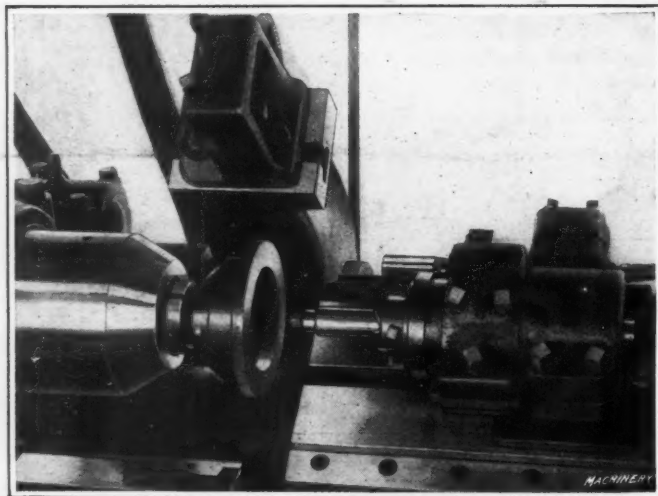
Standard Holder carrying Reamer and Counterboring Tool
